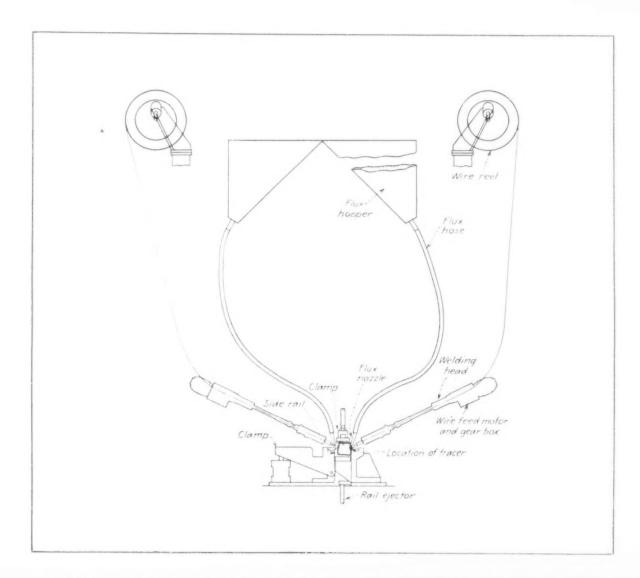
A simplified drawing of 1 of the 3 pairs of submerged-arc welding heads on each machine shows the essential components for welding. All operations are fully automatic, including clamping, welding, feeding, tracing.
